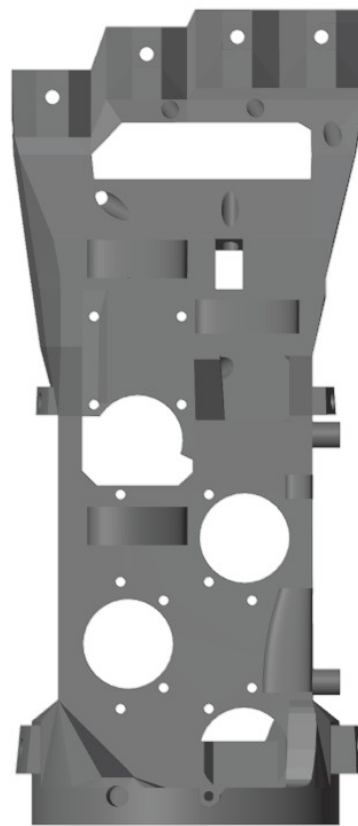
Left Hand - Skeleton - Rear View – no components mounted
